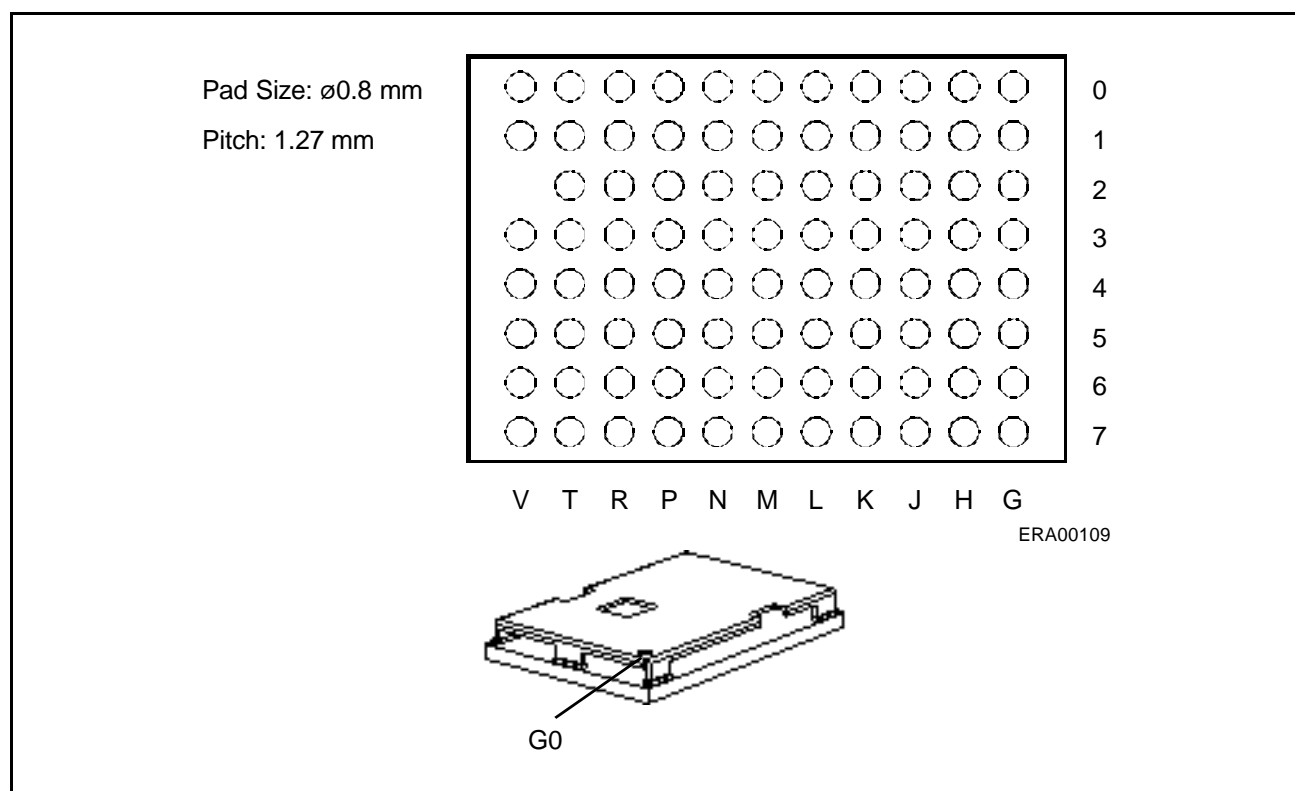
ROK 104 001 Mechanical Dimensions of Footprint, Land Pattern View (seen from above the component)
